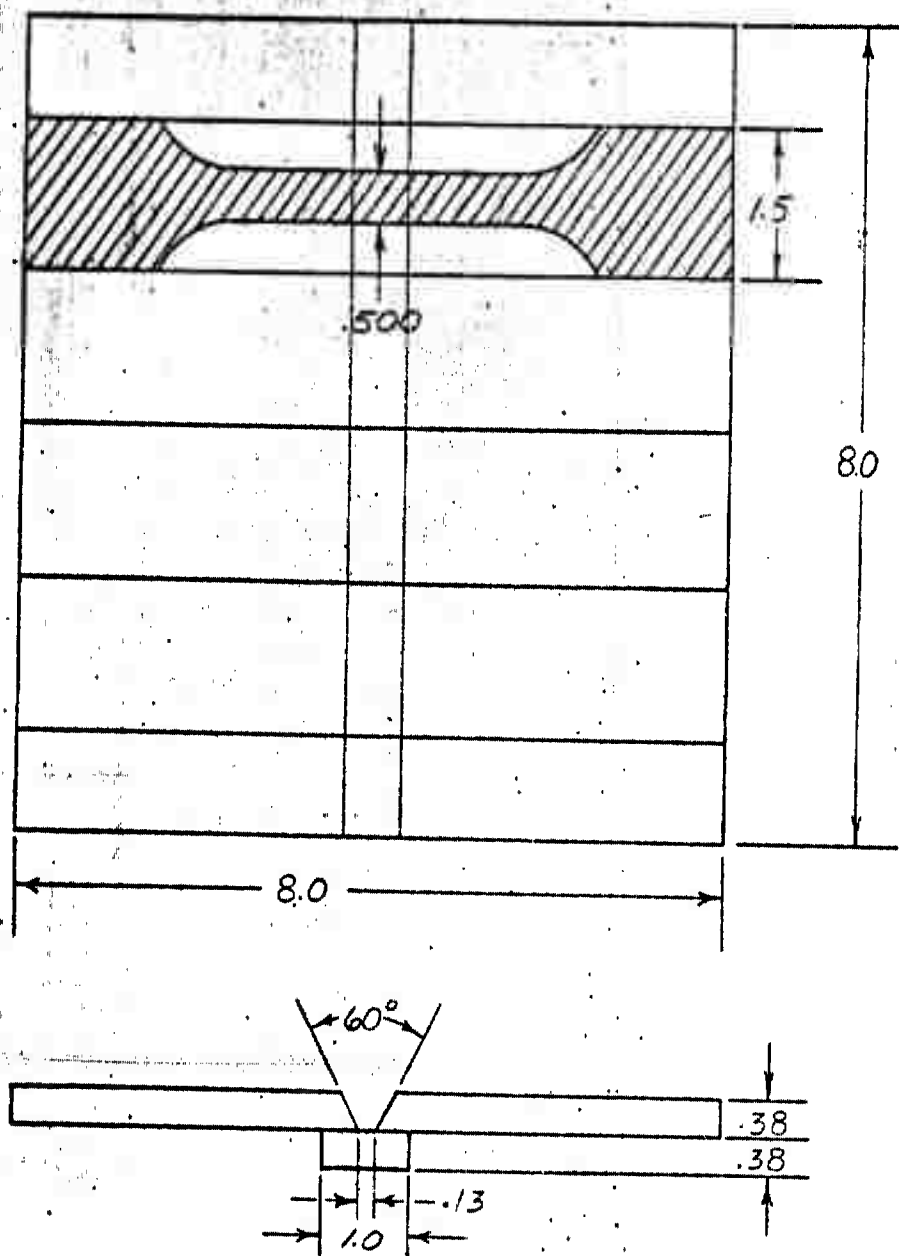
TRANSVERSE TENSILE WELDMENT
